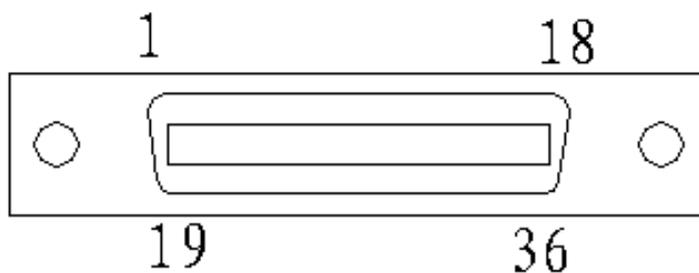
Soldering terminal of XS3 spindle motor optic-electrical encoder (looking from the soldering terminal)
